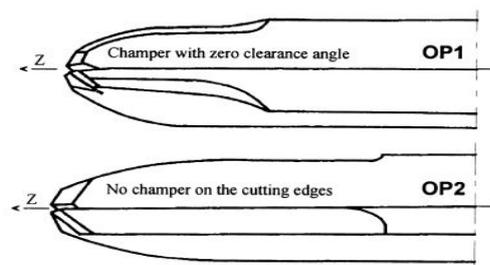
Specific tool geometry for op1 and op2 tool [15]
